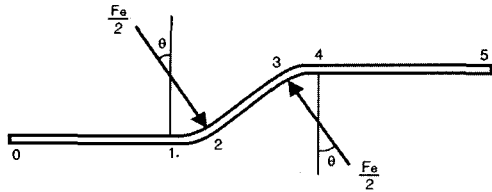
Detail description of the sheet formed by a stepped drawbead
